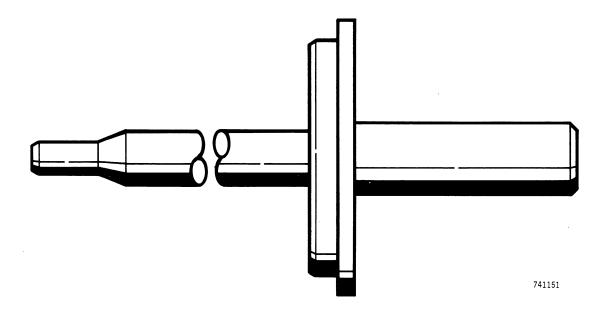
D59985 Alignment Tool for Installing Drive Coupling and Flywheel Housing
